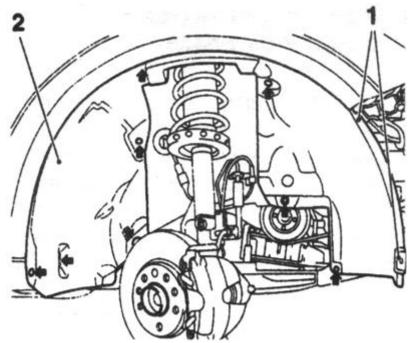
Mounting protection arch before-it Wheels - Arrow given spacing-WIDE rivets arch:
